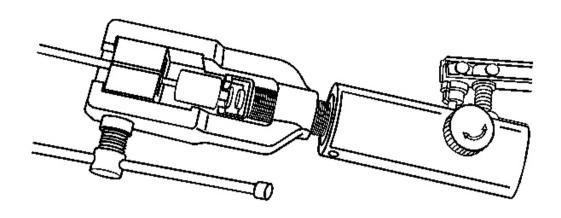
Rotating J 45405 To Bottom Against Die Cage Courtesy of GENERAL MOTORS CORP.
